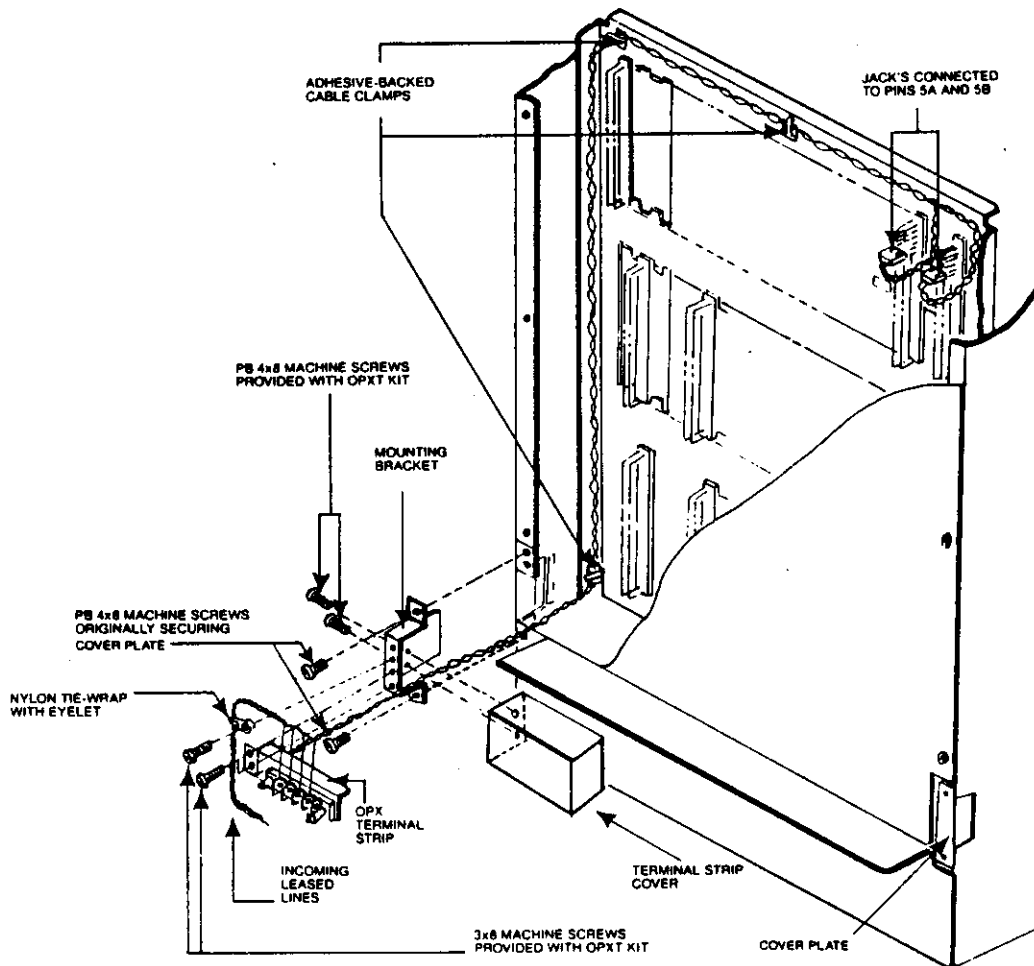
MOUNTING THE TERMINAL STRIP AND CONNECTIONS TO ECUO WIRING PINS
